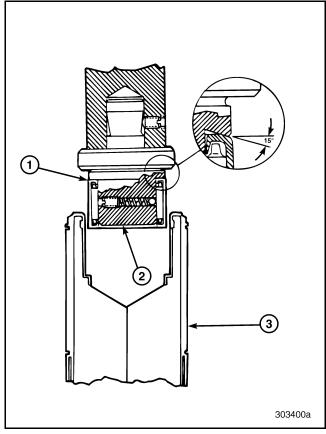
Installation of Drawn Cup Bearings (T313L/T318L Shown)
